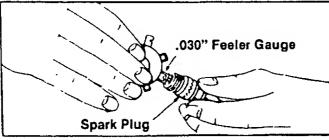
SPARK PLUG CLEARANCE REPLACING BLADE
